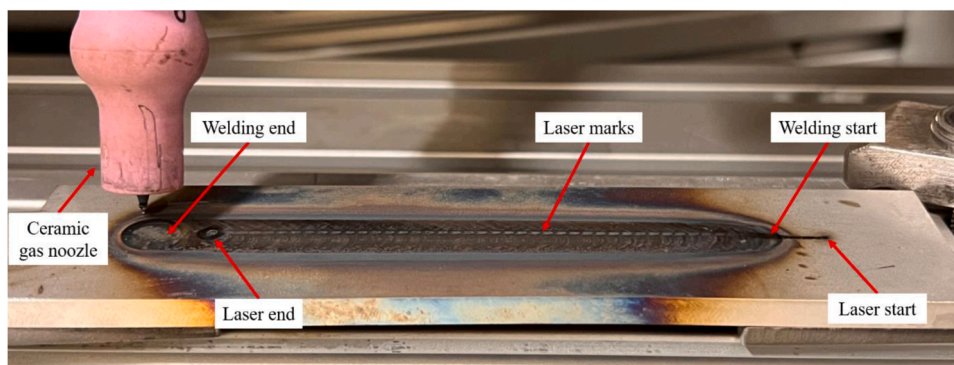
Weld seam with LIBS Laser marks. Start and end point of the welding process and the laser are marked.
